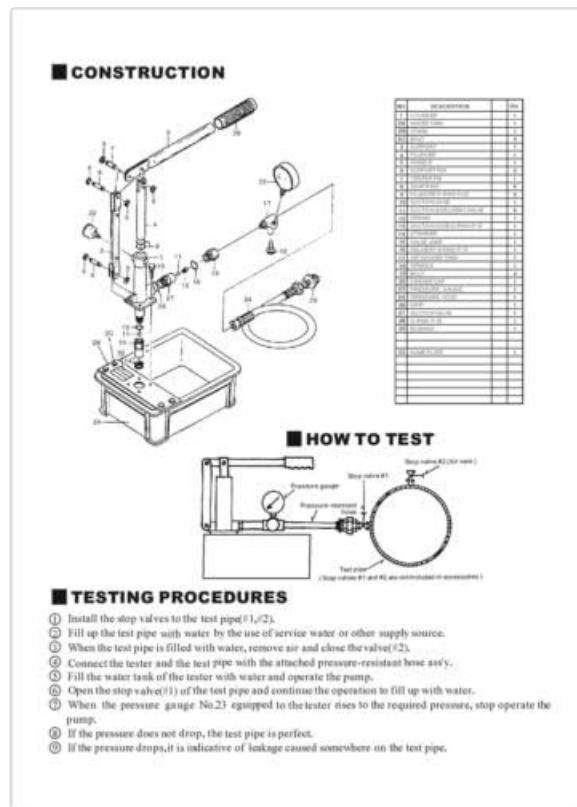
Assembly diagram and testing procedures. The top section illustrates the pump's construction with numbered parts, and the bottom section details the testing process.
